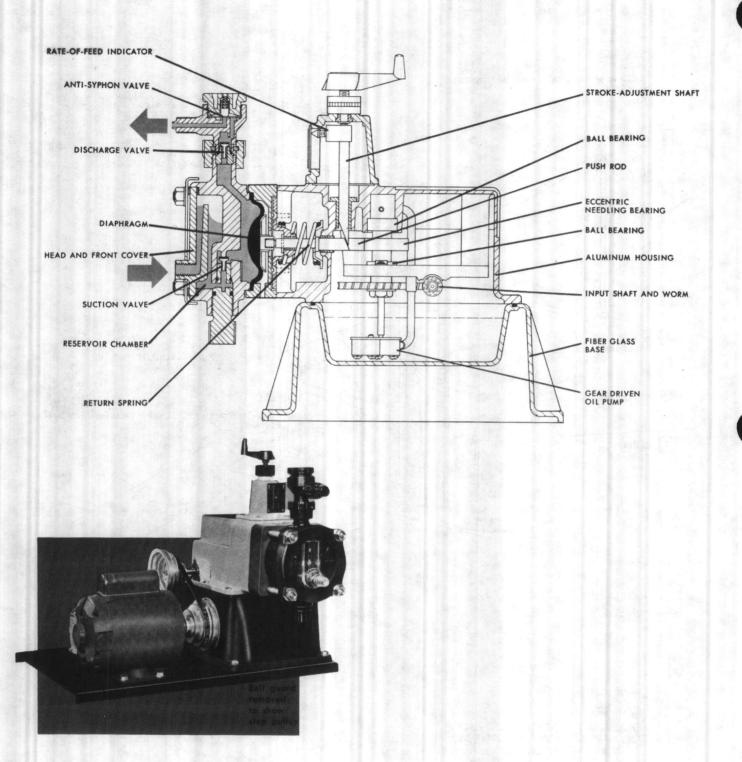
Diaphragm-type pump (Permission of Wallace & Tiernan Division, Pennwalt Corporation)
